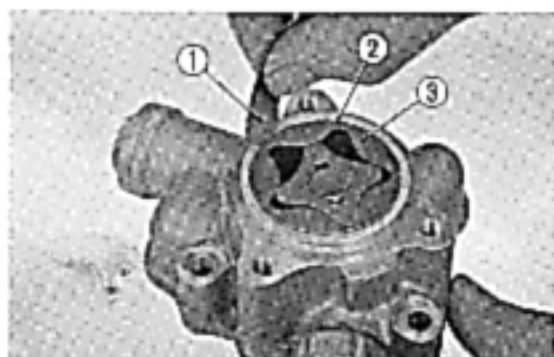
① Feeler gauge ② Outer rotor ③ Pump body
